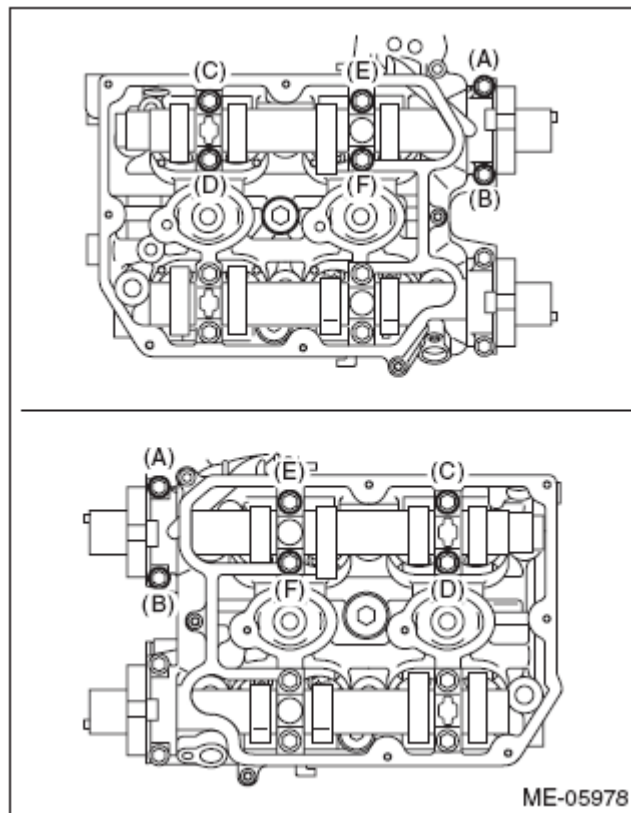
Identifying Alphabetical Loosening Sequence Of Intake Camshaft Cap Bolts
